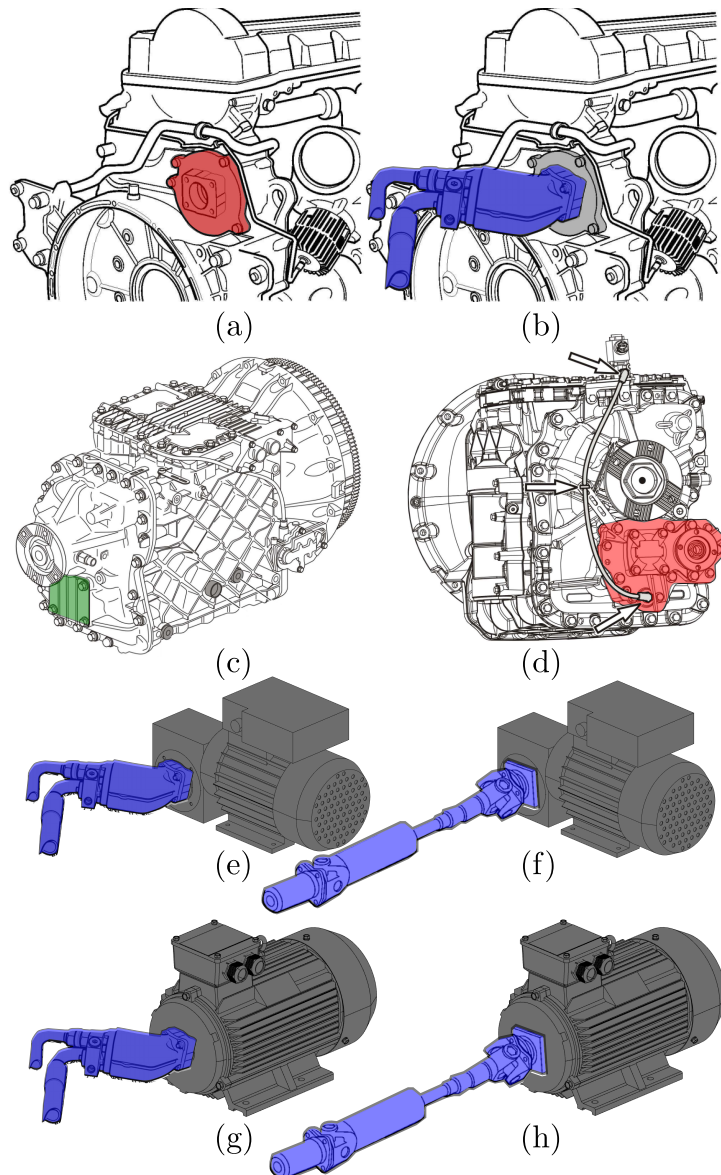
a) Diesel engine rear PTO mount; b) diesel engine with mounted hydraulic pump; c) Transmission with direct PTO mount; d) transmission with geared PTO [70]; geared PTO propelling hydraulic pump e) and universal joint shaft f); direct PTO propelling hydraulic pump g) and universal joint shaft h).
